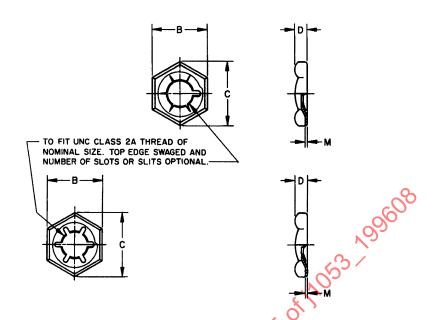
FORMED THREAD REGULAR TYPE STAMPED NUTS
